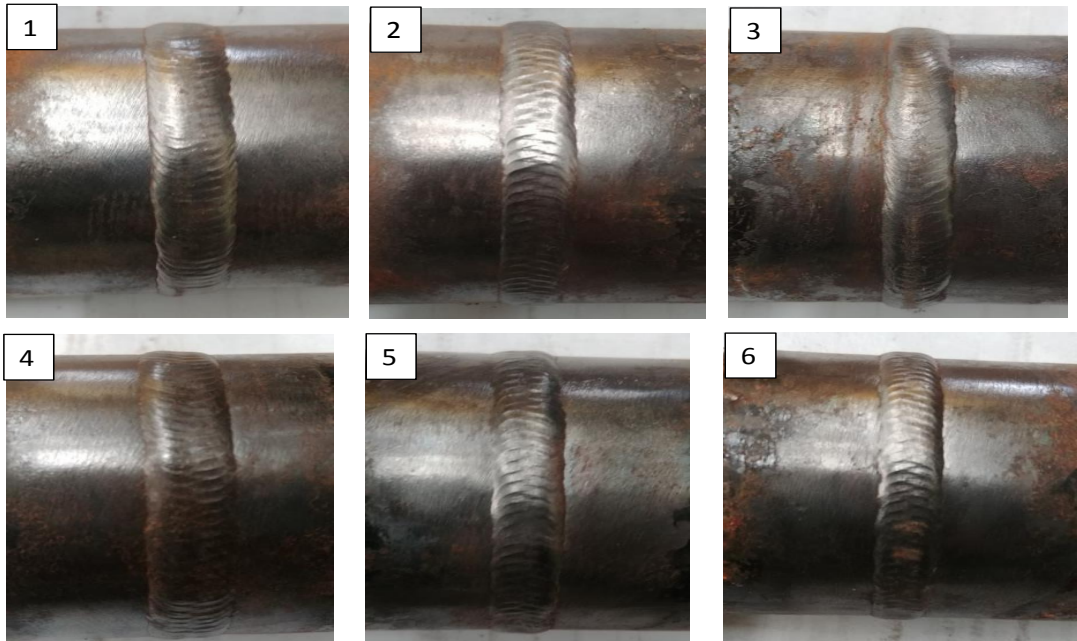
Top view of high speed welded coupon under various welding conditions
